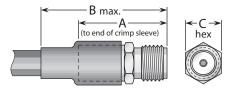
(Crimp type, shown with supplied heat-shrink tubing)
